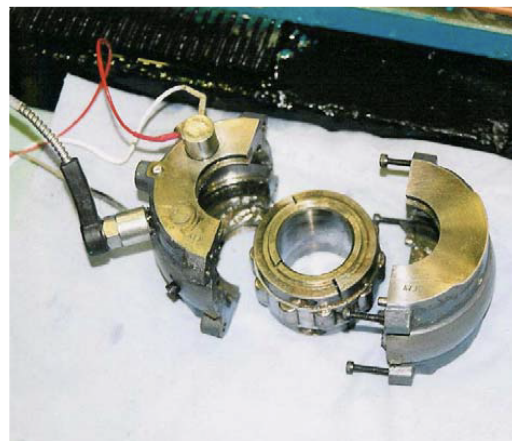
Cooper split-type roller bearing with housing and sensors (Source: [16])
